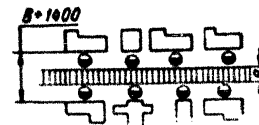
Clearance between Two Rows of Machine Tools for Placement between Them and Rollway or Conveyor
